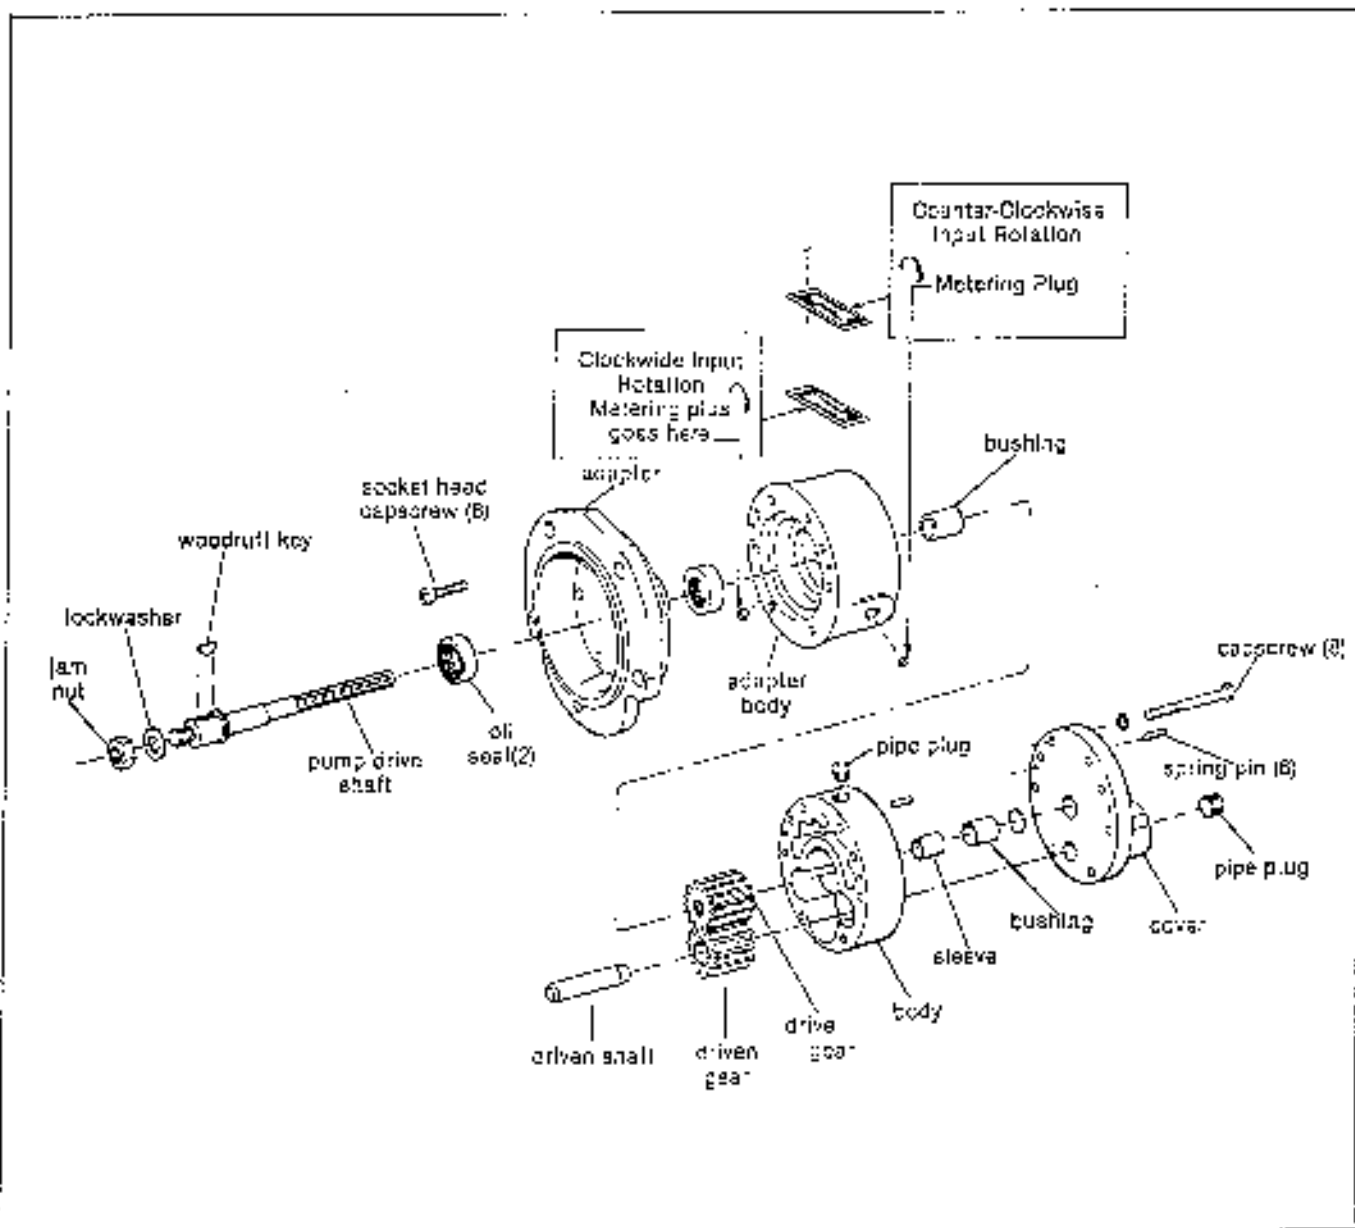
Oil Pump; Single Direct Mount Style Shown.
